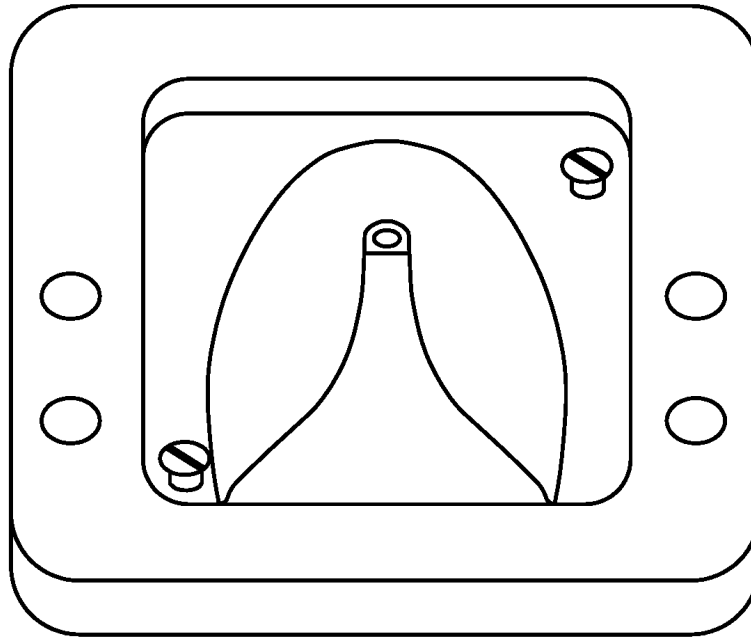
Metal mounting tray with heel in position before addition of molten metal alloy
